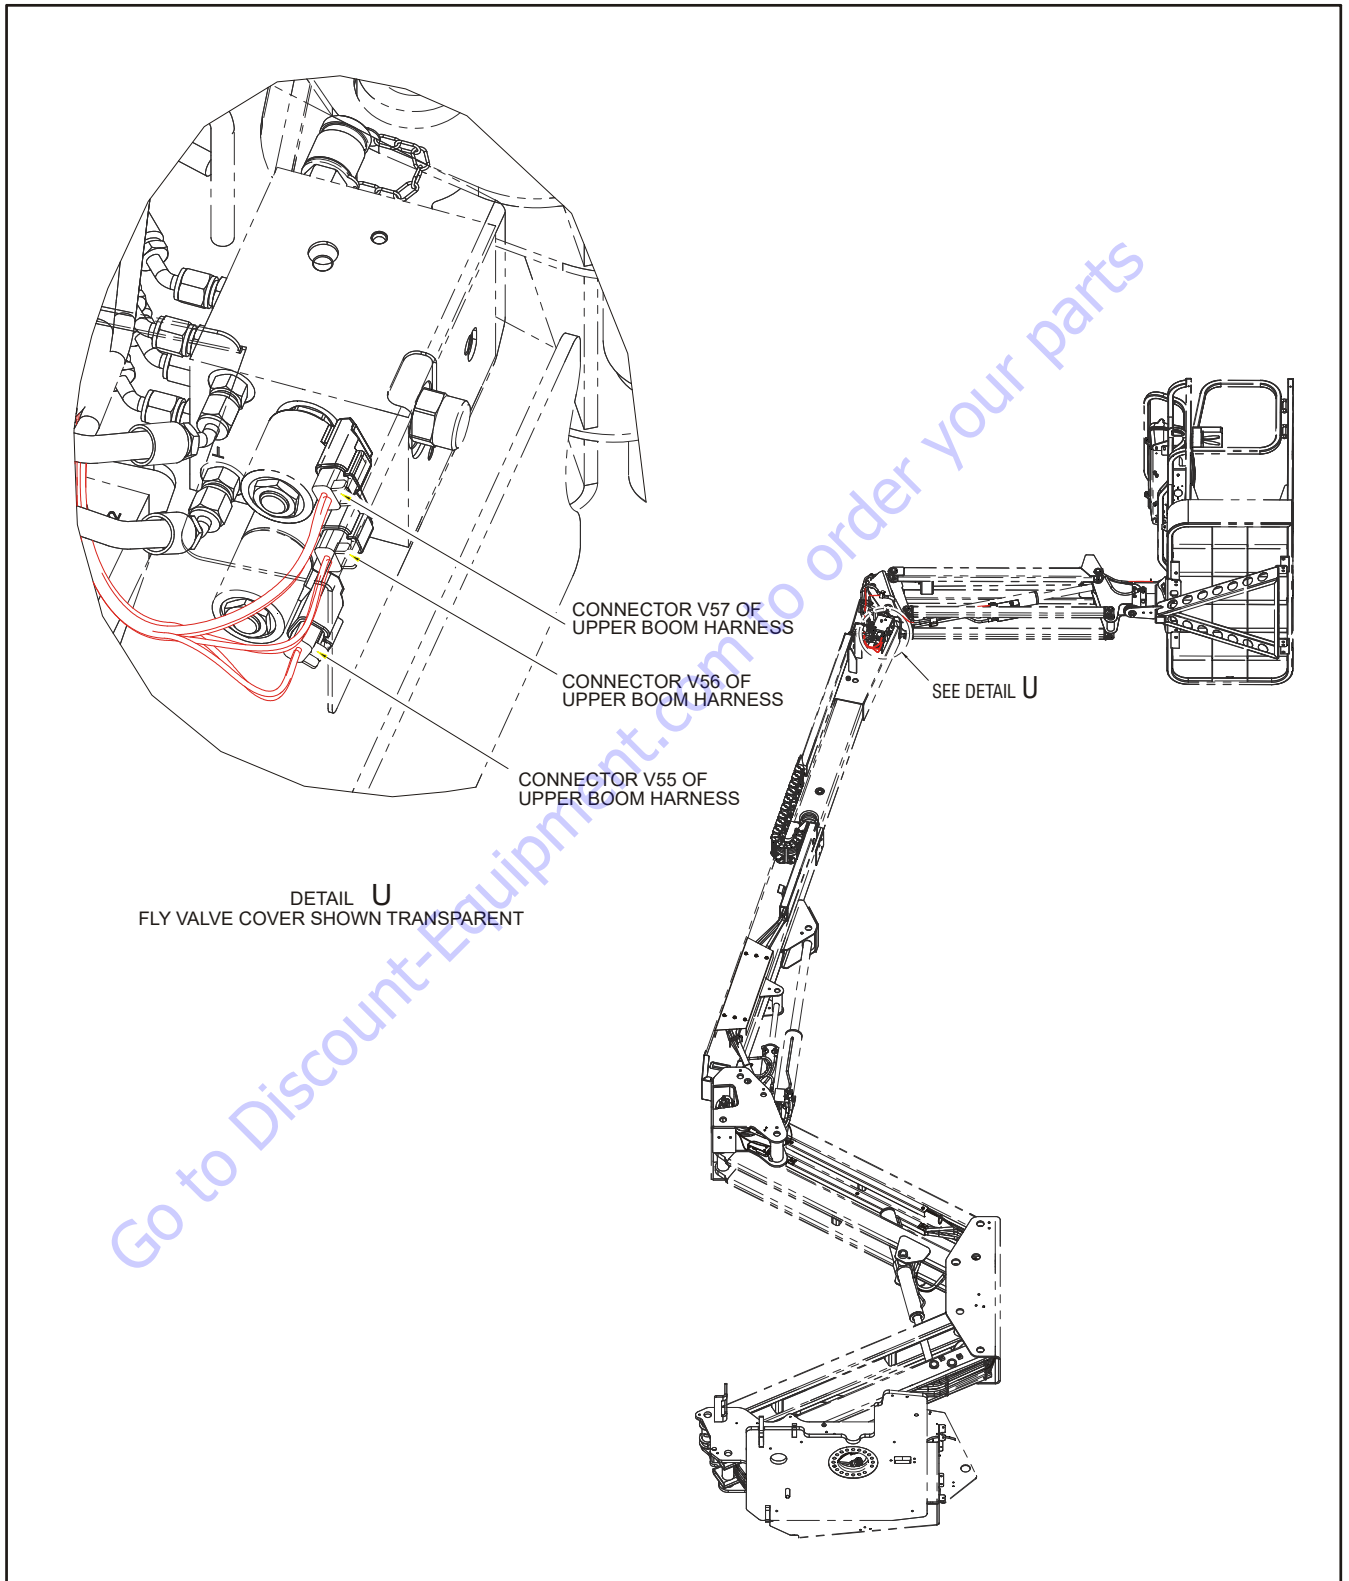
Cable Installation and Identification - Sheet 8 of 8
